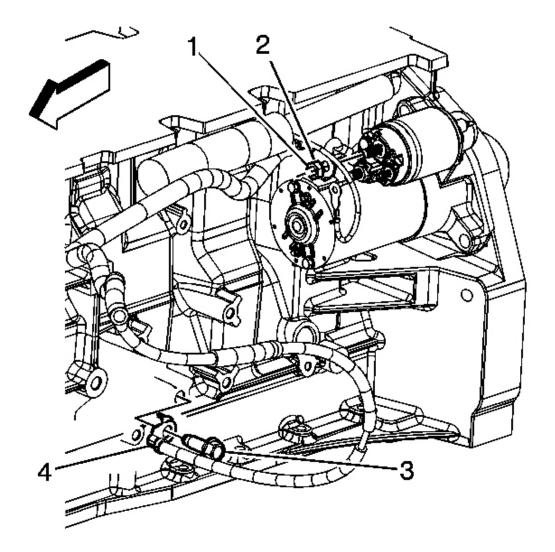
Identifying Battery Cables & Related Components Courtesy of GENERAL MOTORS CORP.
